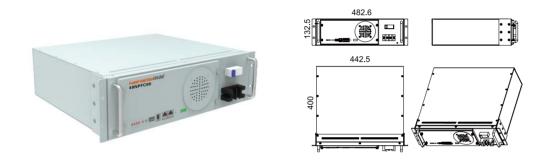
Appearance & Mechanical Drawing of 48NPFC80
